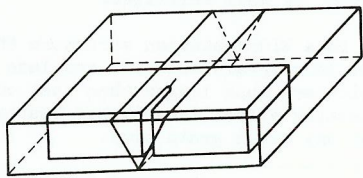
Three point bend specimen orientation in the weld metal.
